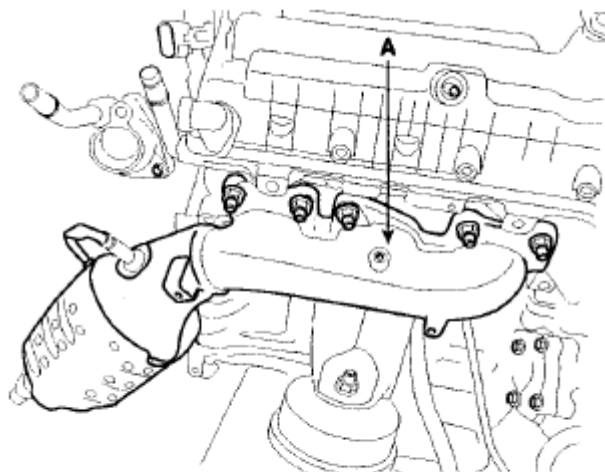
Identifying RH Exhaust Manifold Heat Protector (A)
